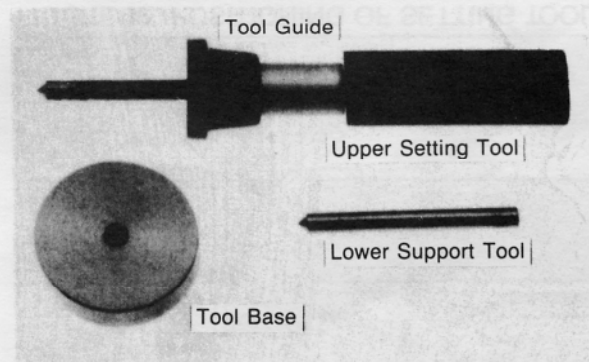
TOOL GUIDE AND SETTING TOOL
